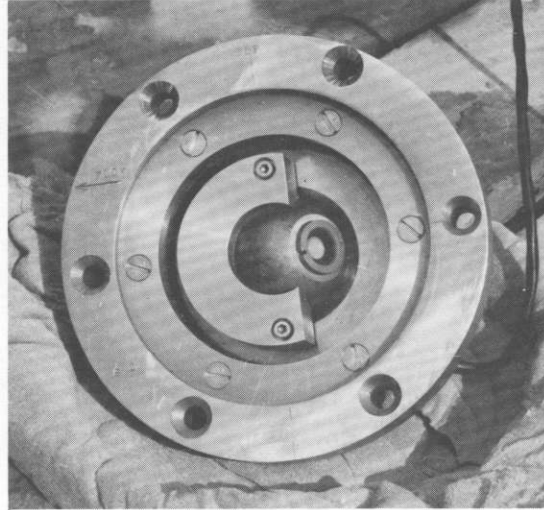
Transducer adapter assembly. (See fig. 6 of main text for additional detail; outside plate 7-3/4 in. in diameter)
